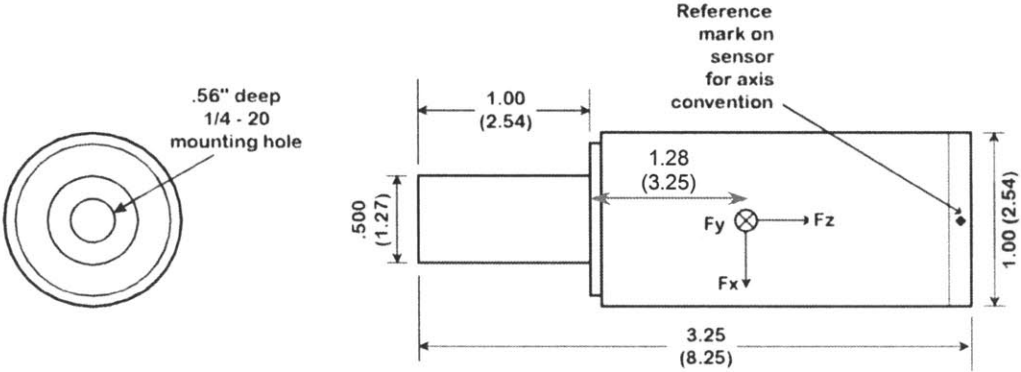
Dimensions of MC1-250 sensor showing axis convention and origin
